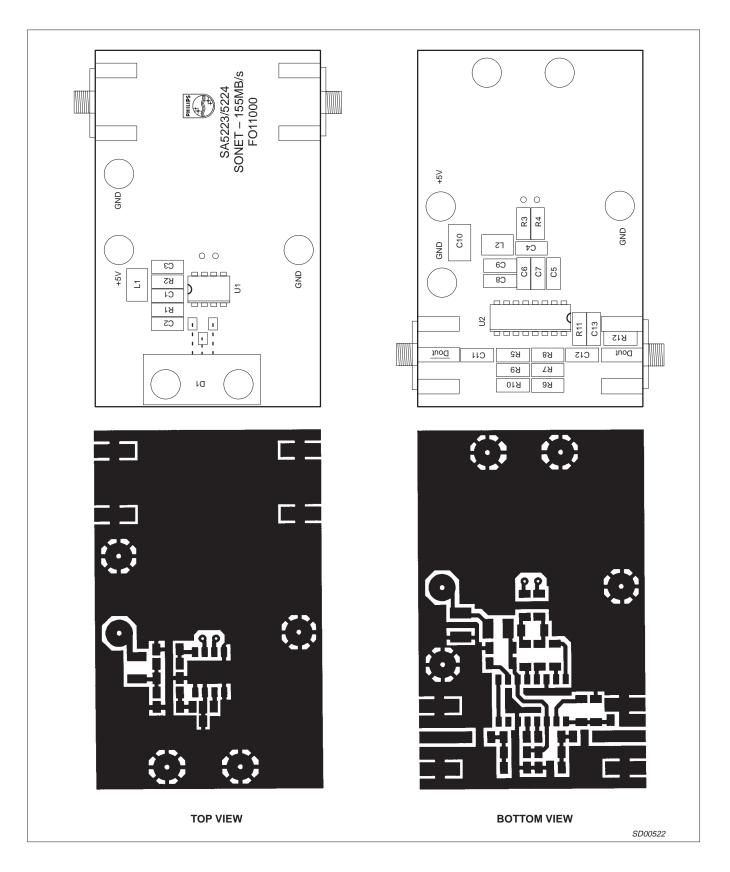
SA5223 Board Layout (NOT ACTUAL SIZE)
